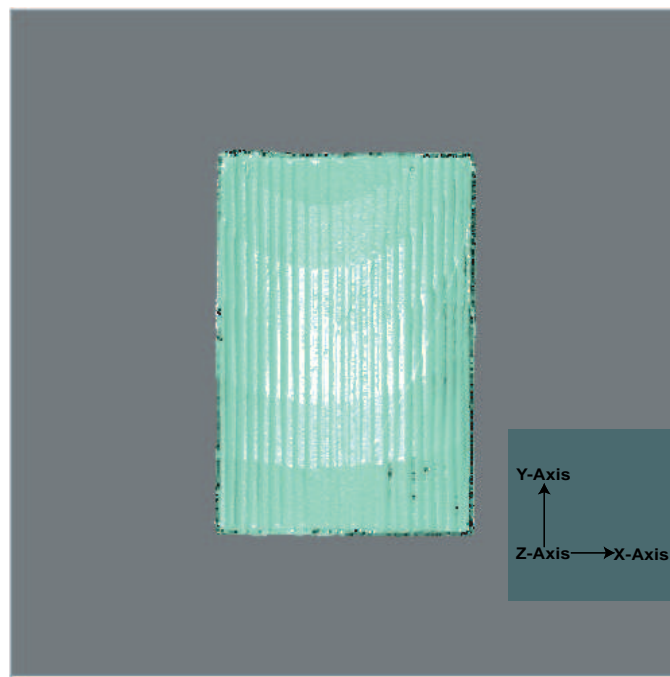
Machined part of example 2 with tolerance 0.01 inches
